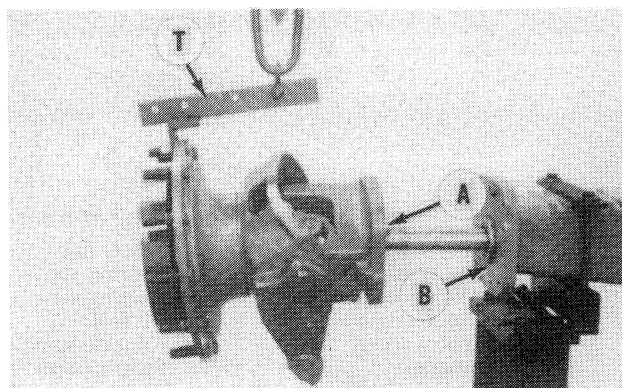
Wheel hub and knuckle-spindle assembly can be removed as a unit from axle housing. Lifting tool (T) may be fabricated using dimensions given in Fig. 278.
